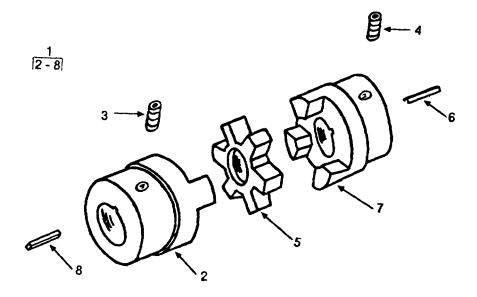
CIRCULATING PUMP AND MOTOR COUPLING.
